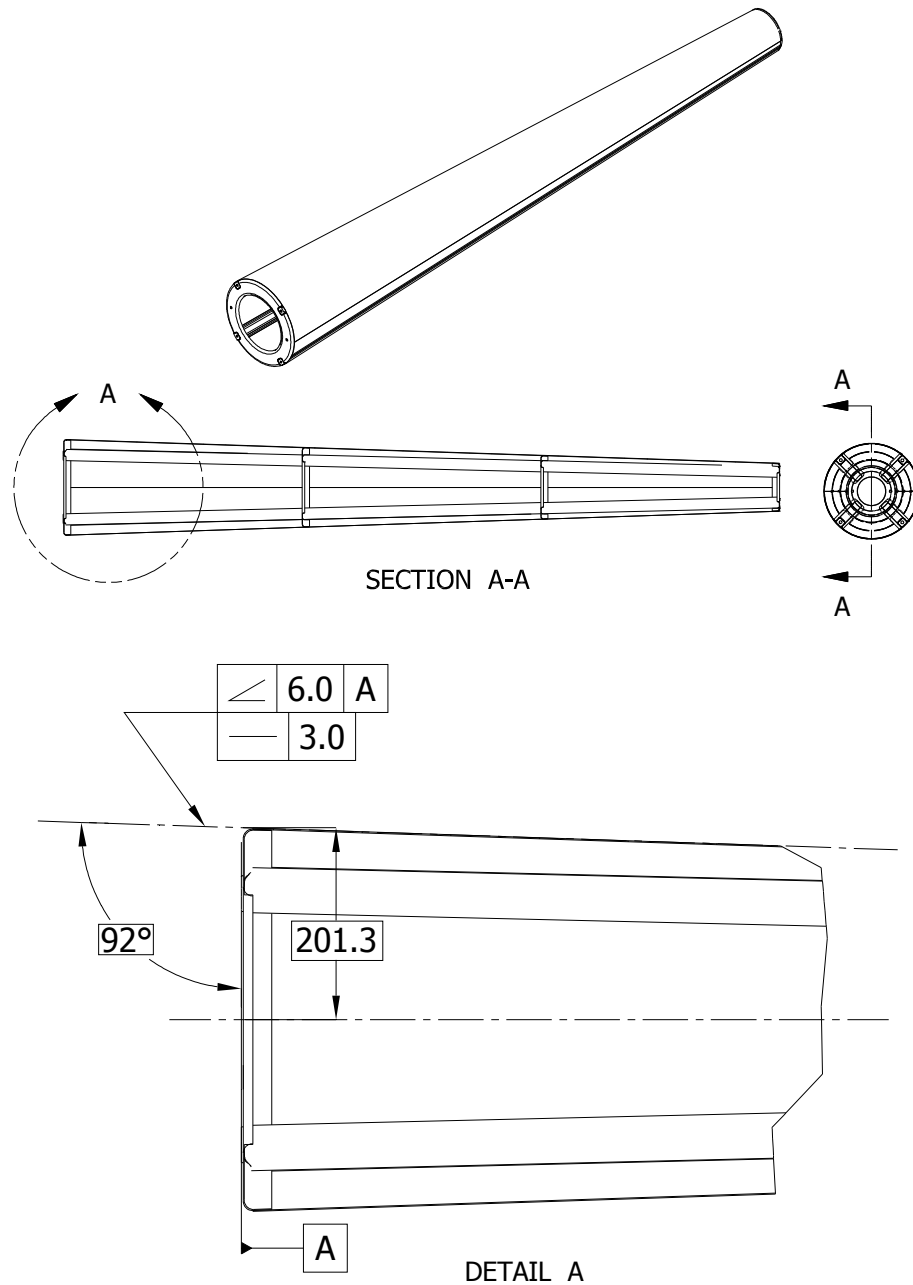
Projected Tail Rotor Shaft Centerline (PSCL)
